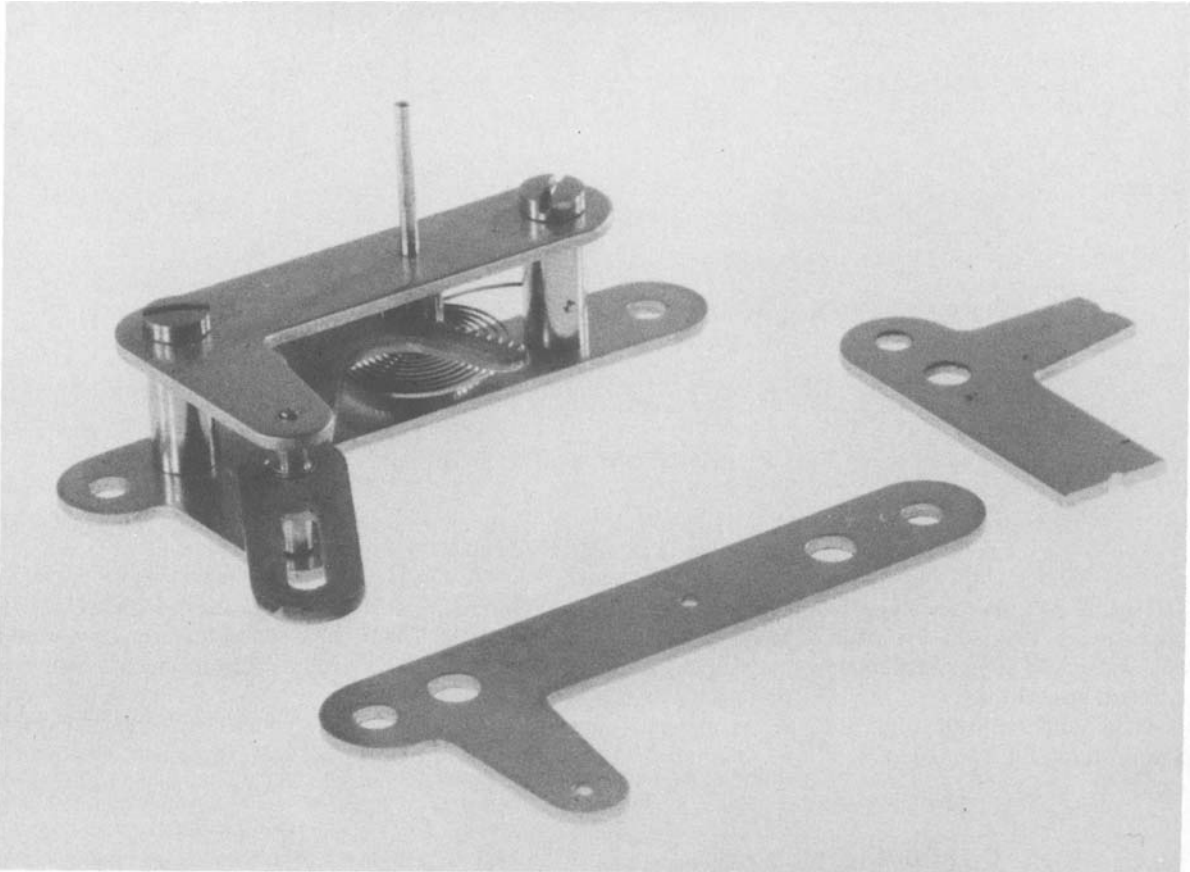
Photograph showing a typical pressure gauge movement and one of the workplates.
